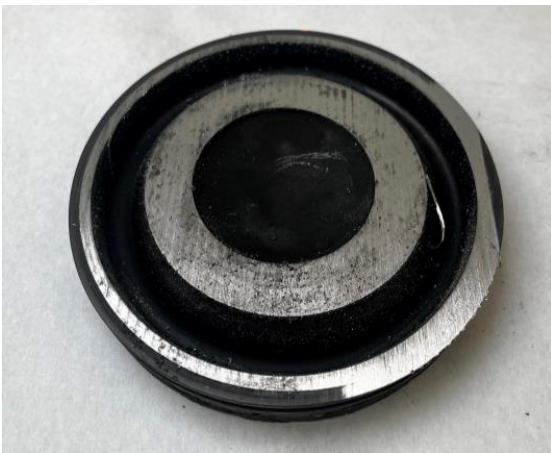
Cross sectional view of piston 12 top part of cooling gallery after cleaning.
